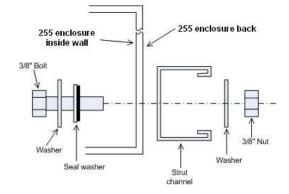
Stainless Steel Enclosure — Mounting Hardware Stack Detail
